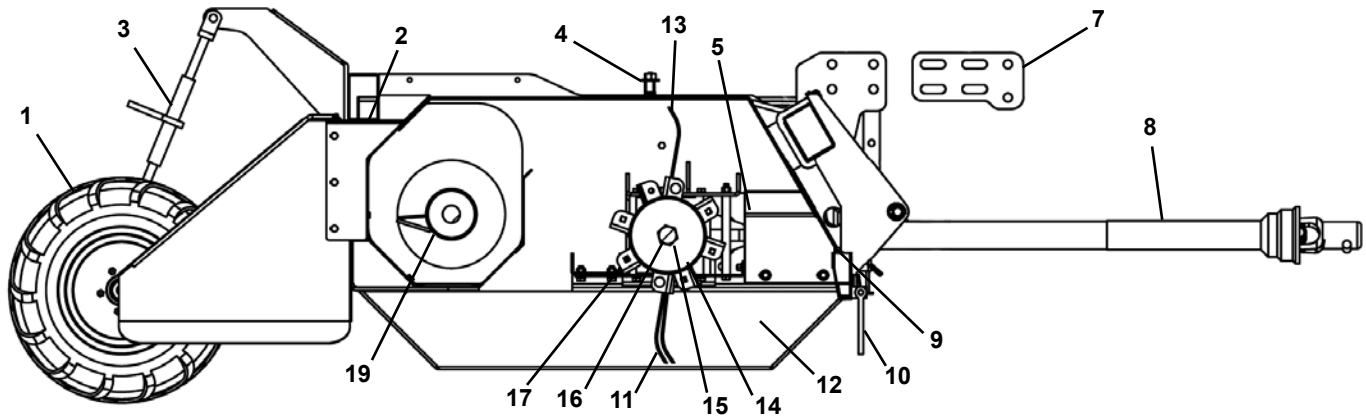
Flail Shredder with 3-Pt Hitch Principal Components
